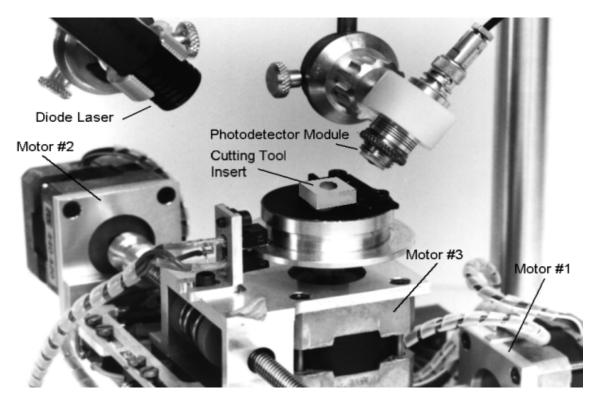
Scanning Apparatus for Cutting Tool Inserts
